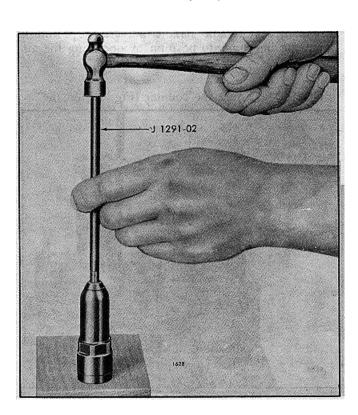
Removing Spray Tip from Injector Nut using Tool J 1291-02
